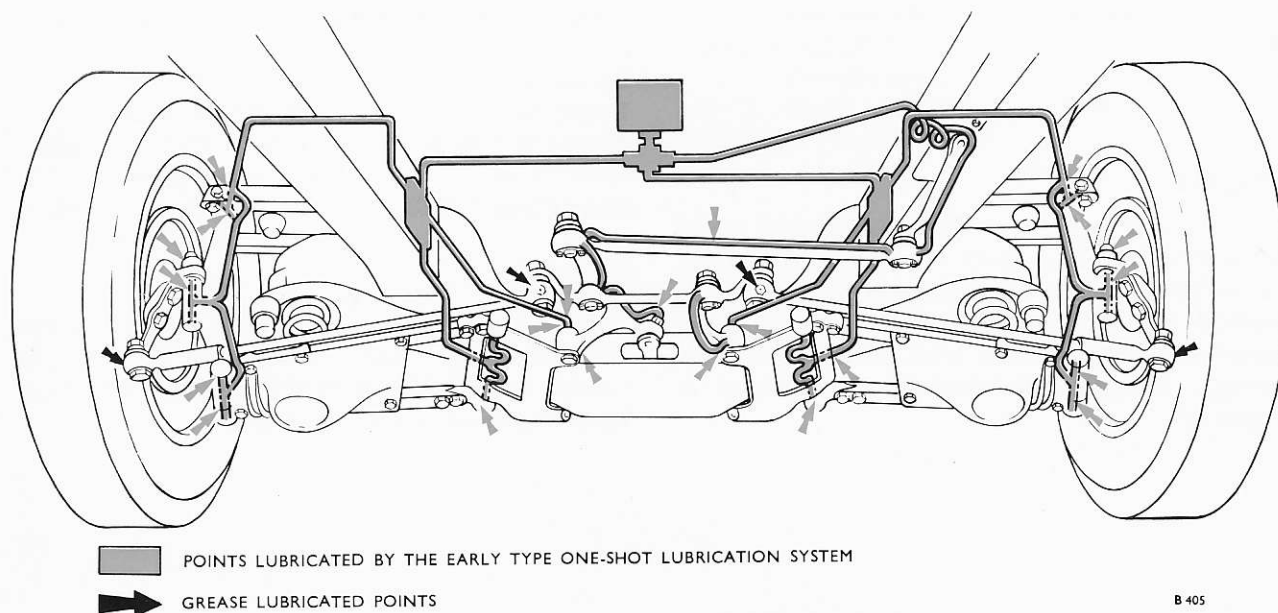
Early type one-shot oil lubrication system and grease lubricated track rods only
